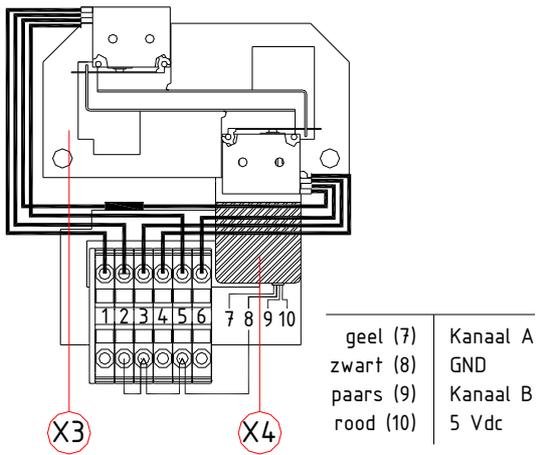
X3 + X4 (Lay-out limit switch + encoder motor gearbox External)
